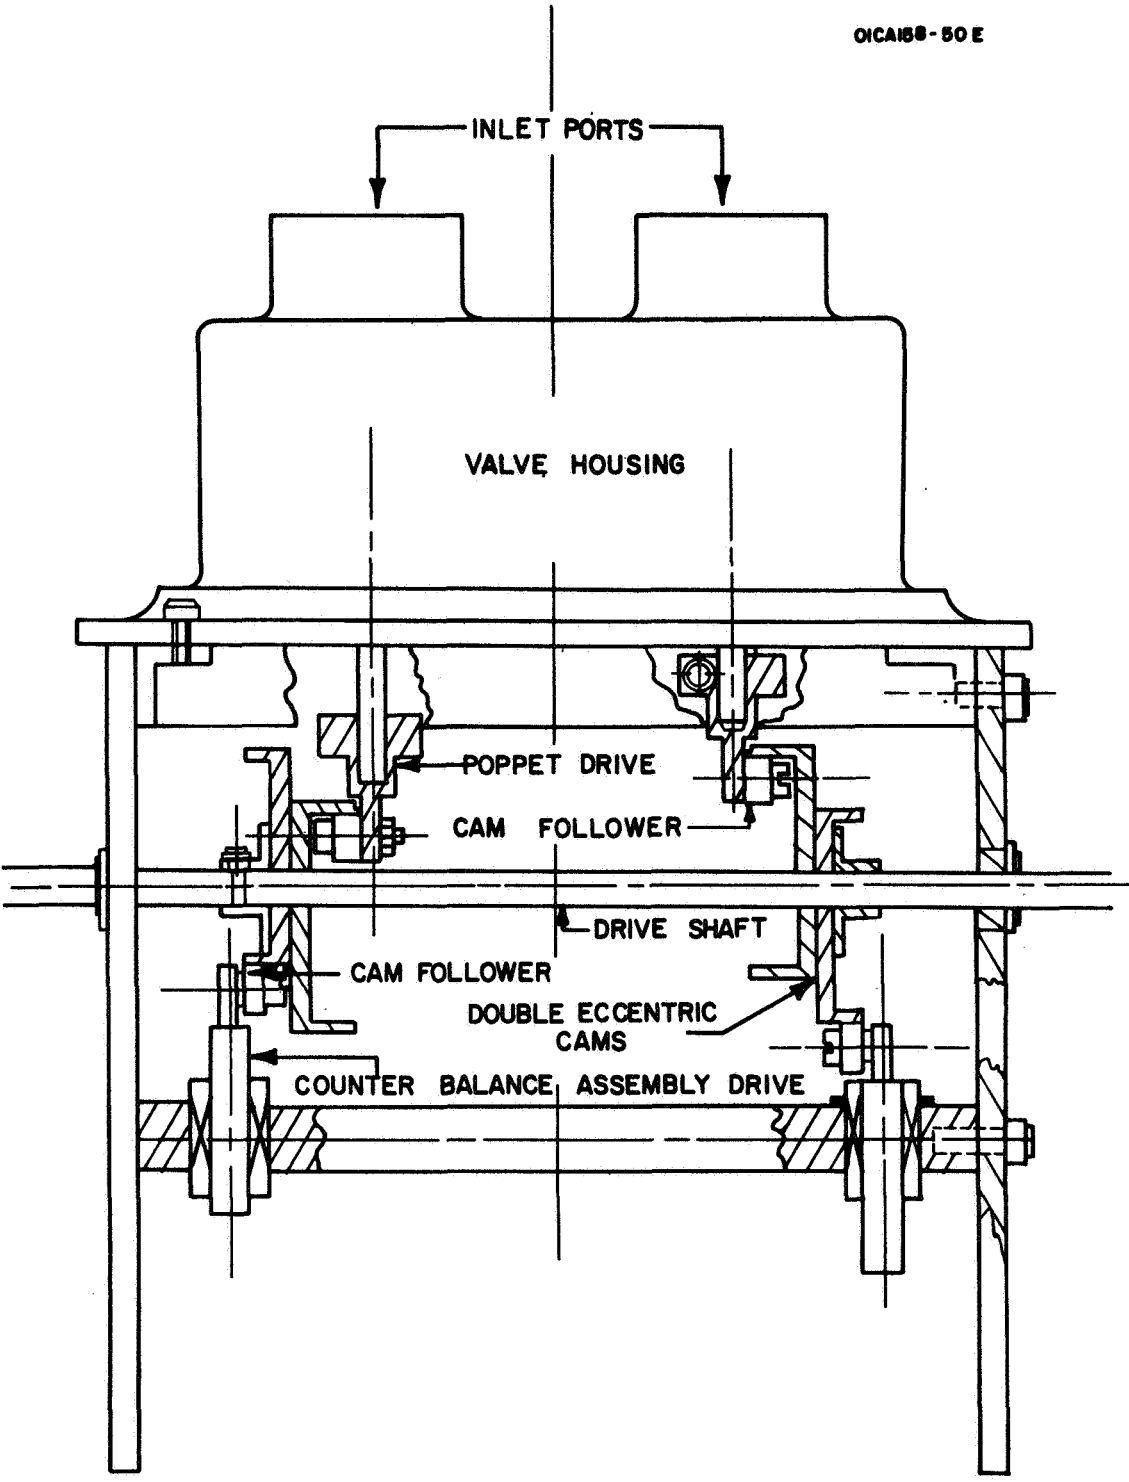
Mechanical cam follower drive for the linear reciprocating valve.
